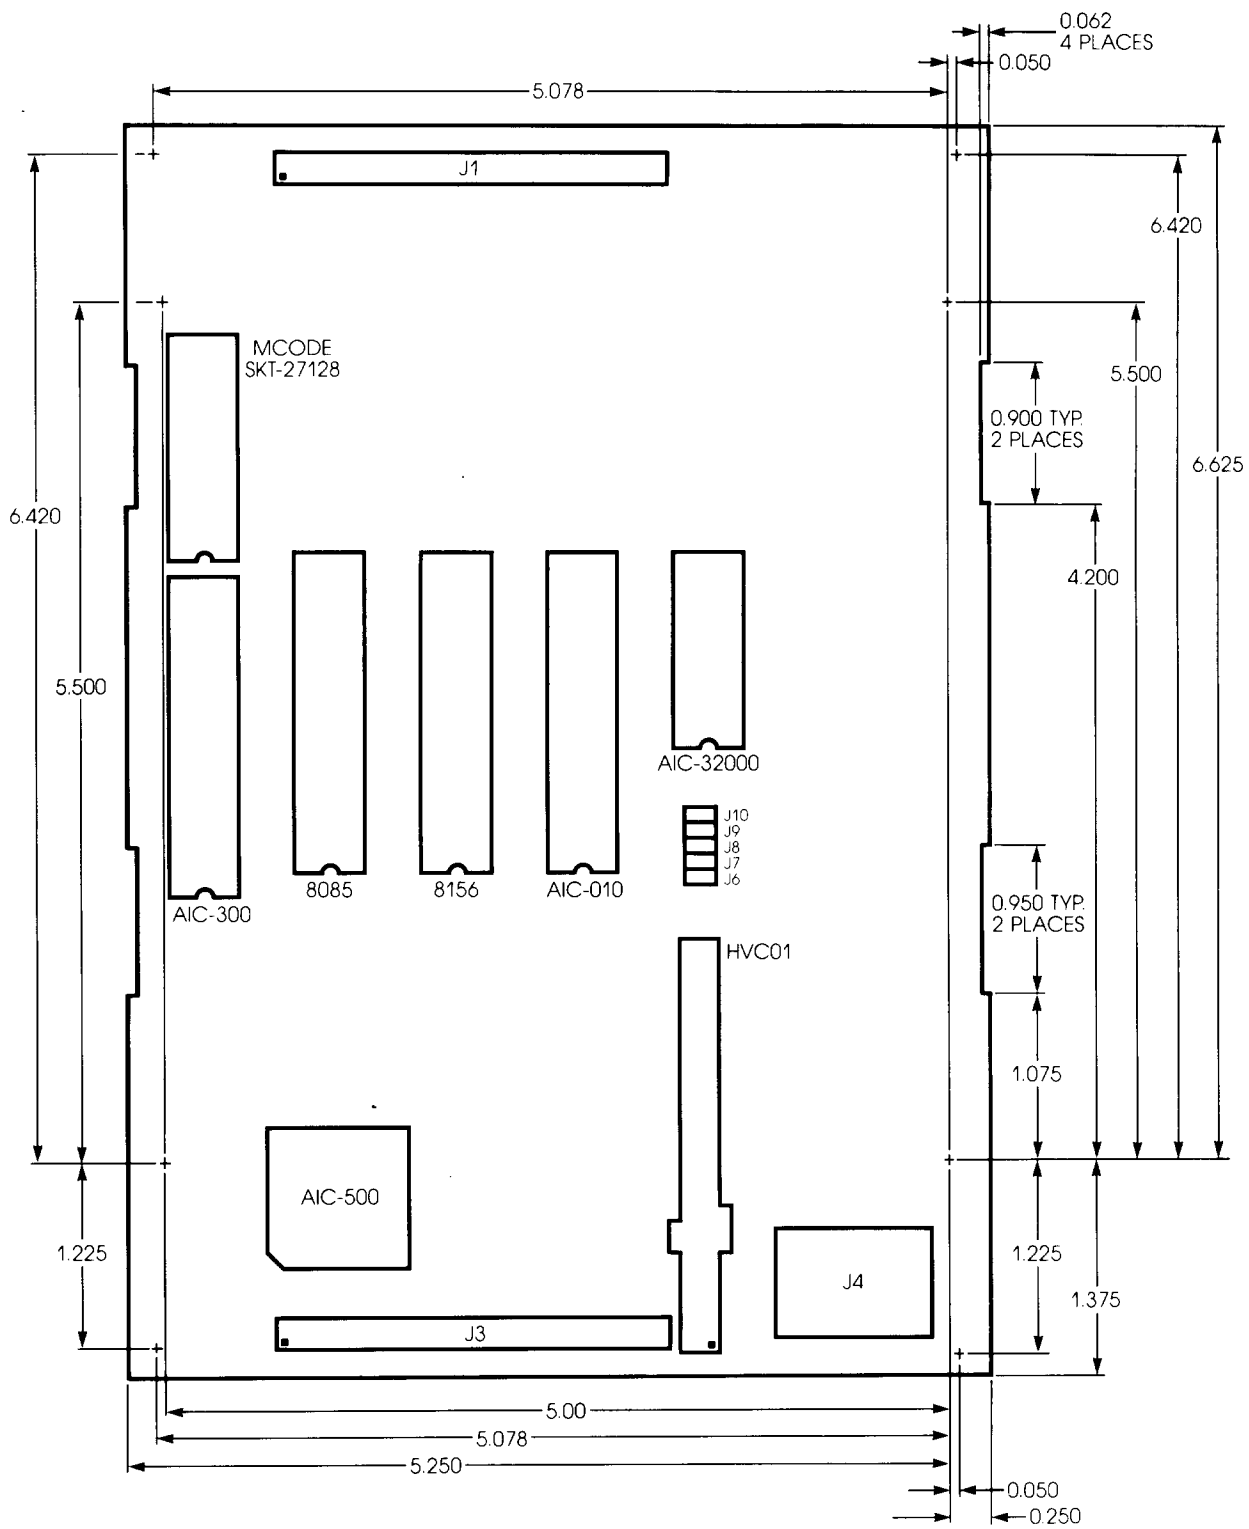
ACB-3530A BOARD LAYOUT
